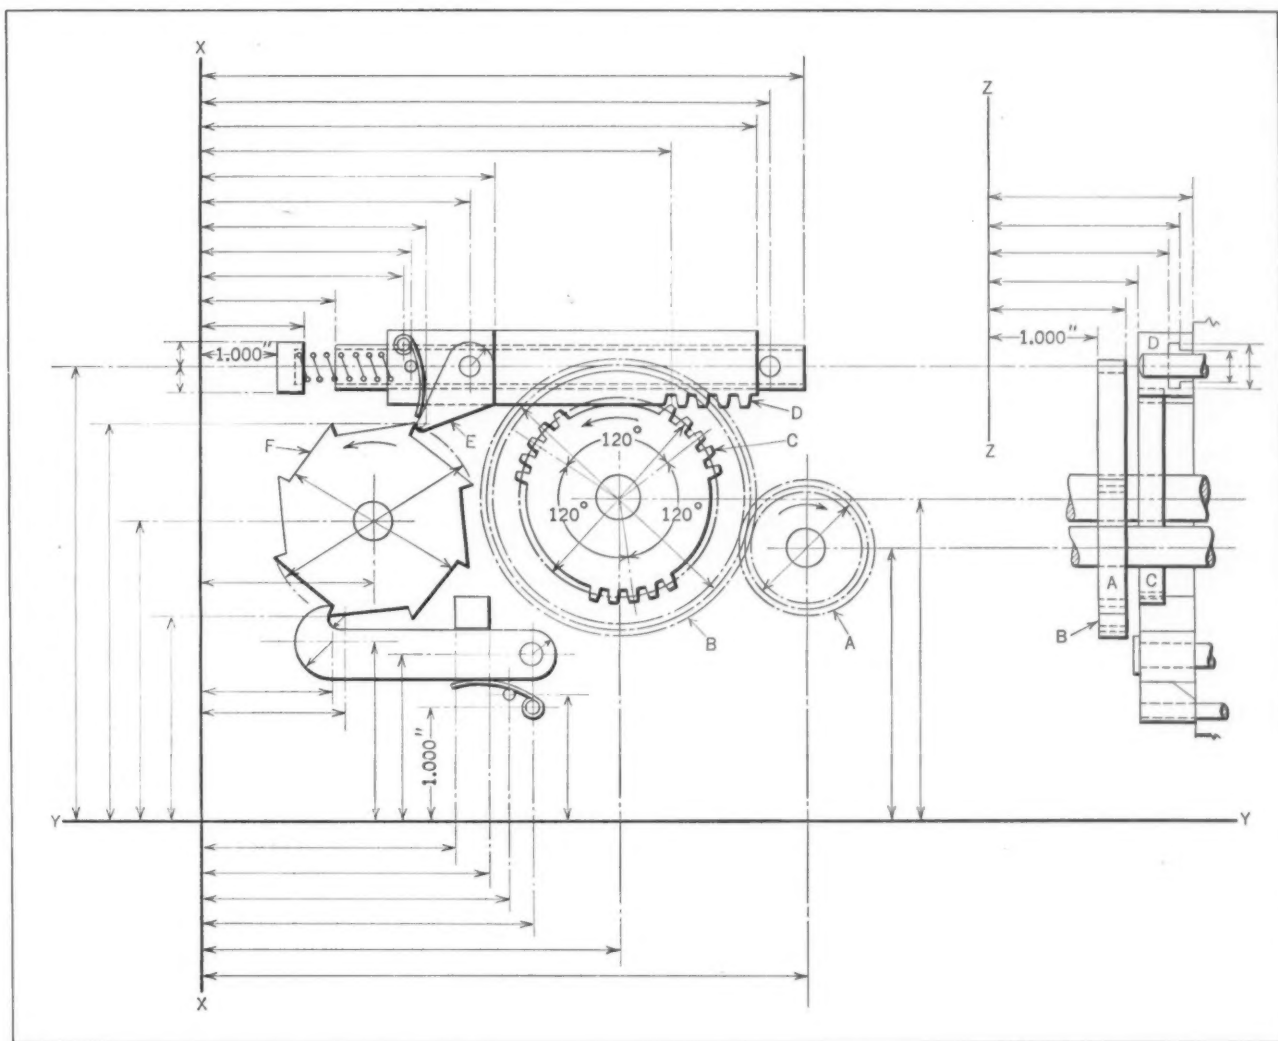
Step Method of Dimensioning an Assembly, which Establishes Positions of Mating Parts from Same Base Lines
